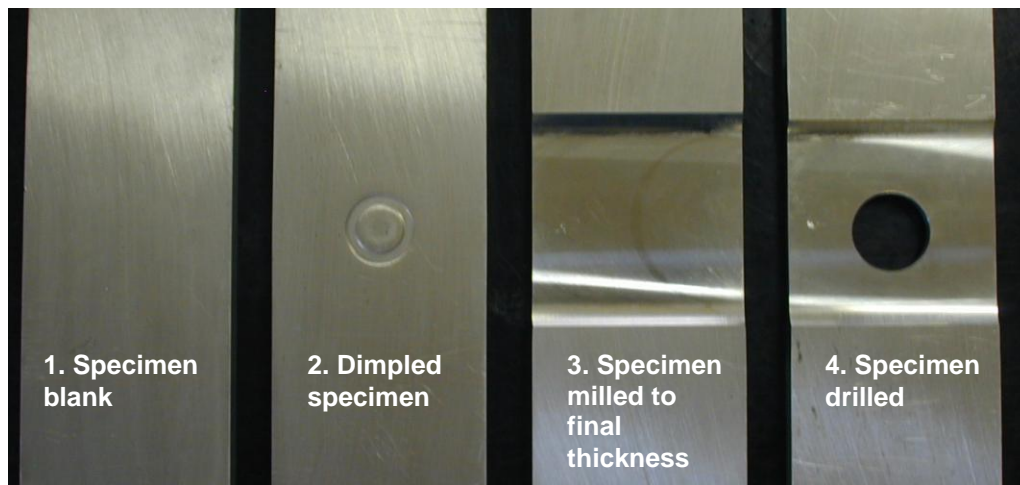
SWCW Specimen Assembly (1.125 inch hole shown)
